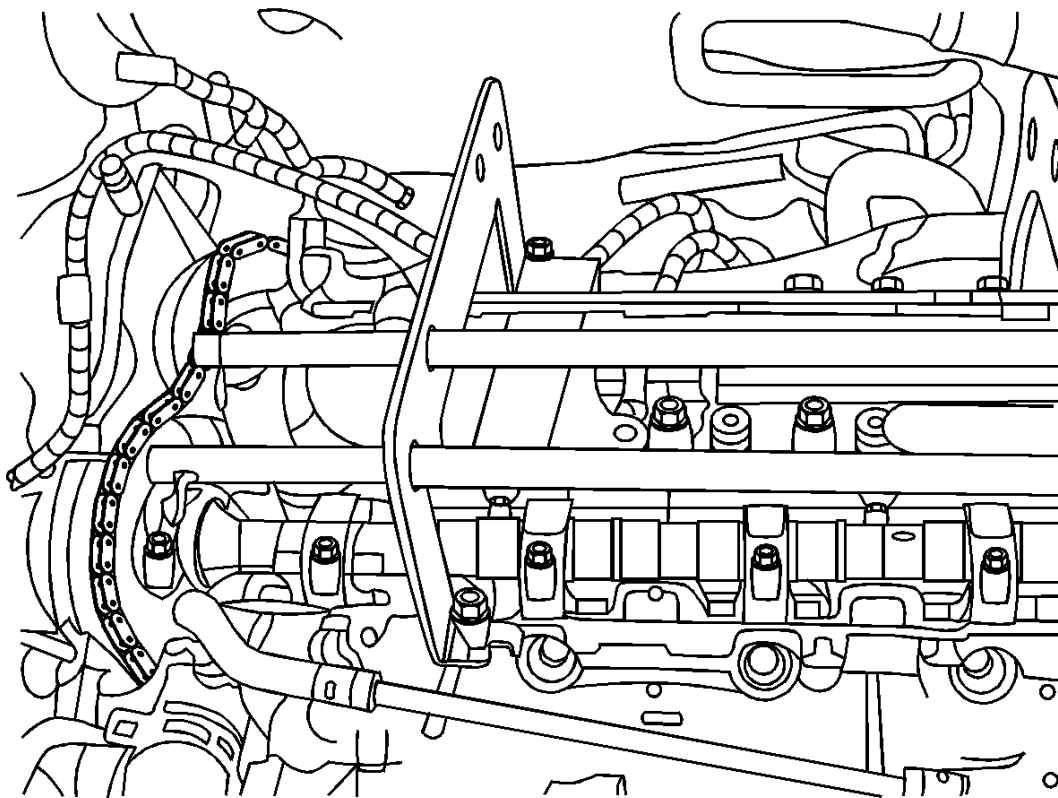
View Of J 43649 Valve Spring Compressor (Second Camshaft Cover Bolt Hole)
